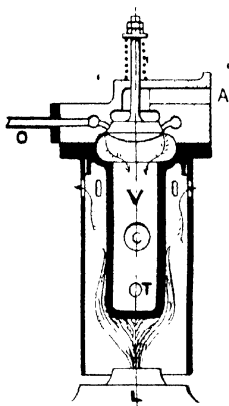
Campbell paraffin oil vaporiser with shifting feed injection and lamp-heated igniter.
